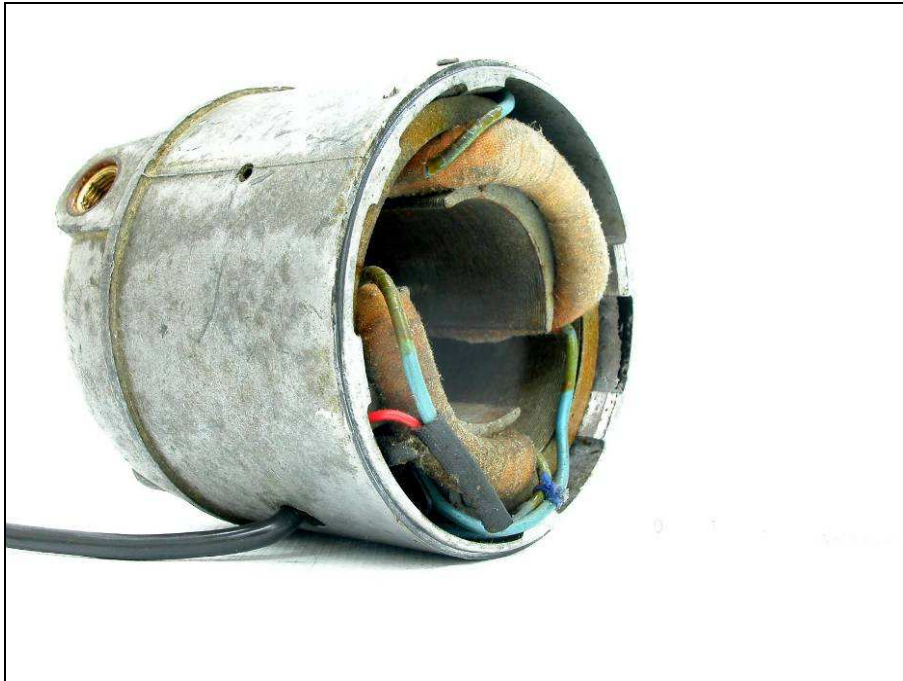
Interior of housing: Yoke ring with two symmetrical main poles and their excitation winding wrapped in fabric
